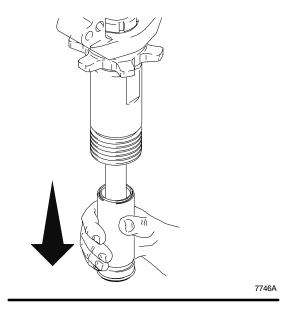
Invert piston rod and sleeve and pound on hard surface until piston rod comes out of sleeve.
